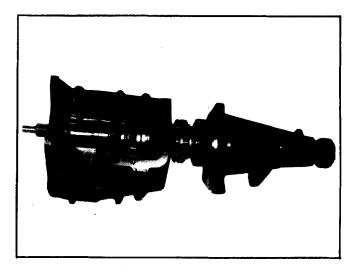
C-8 Removing or Installing Mainshaft Assembly
